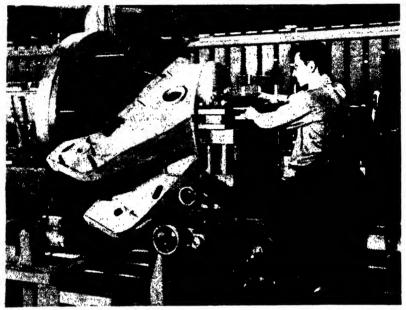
Facing the bottom of a gun mount in a gap-bed lathe.
